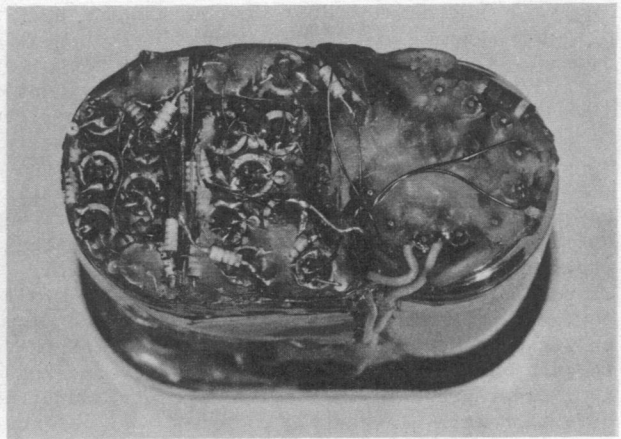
Close-up View of Bottom Layer of TV Circuit Module.
